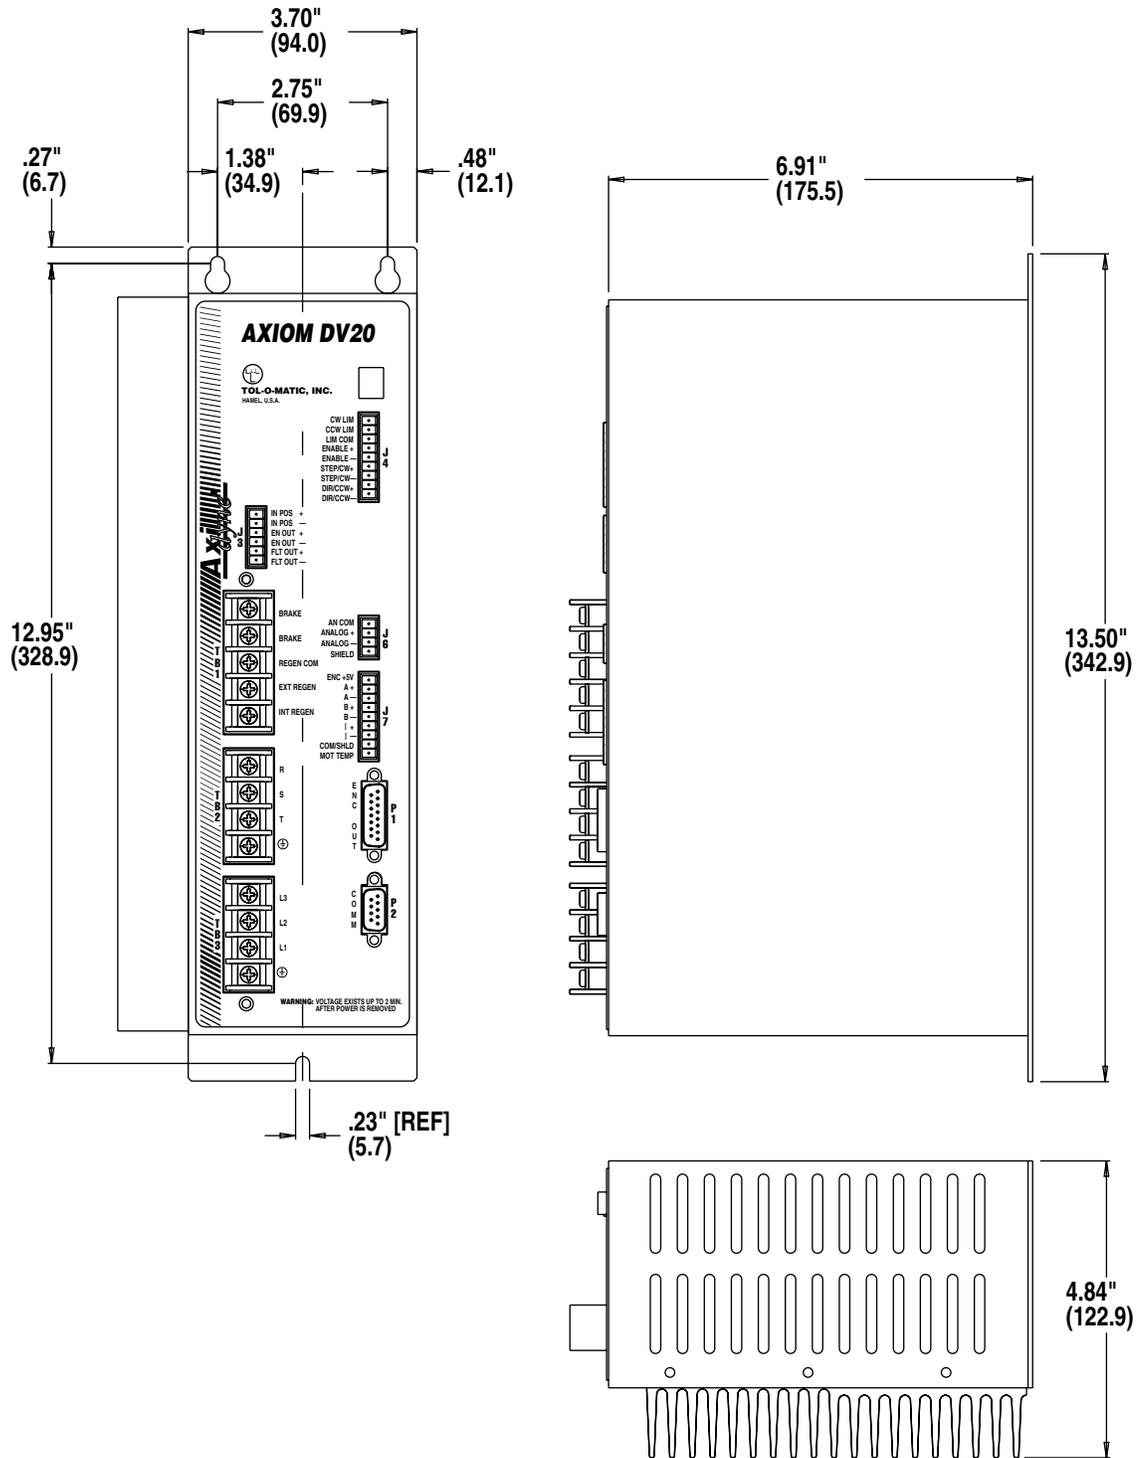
Axiom DV20 and Axiom DV30 Drive Mounting Dimensions
